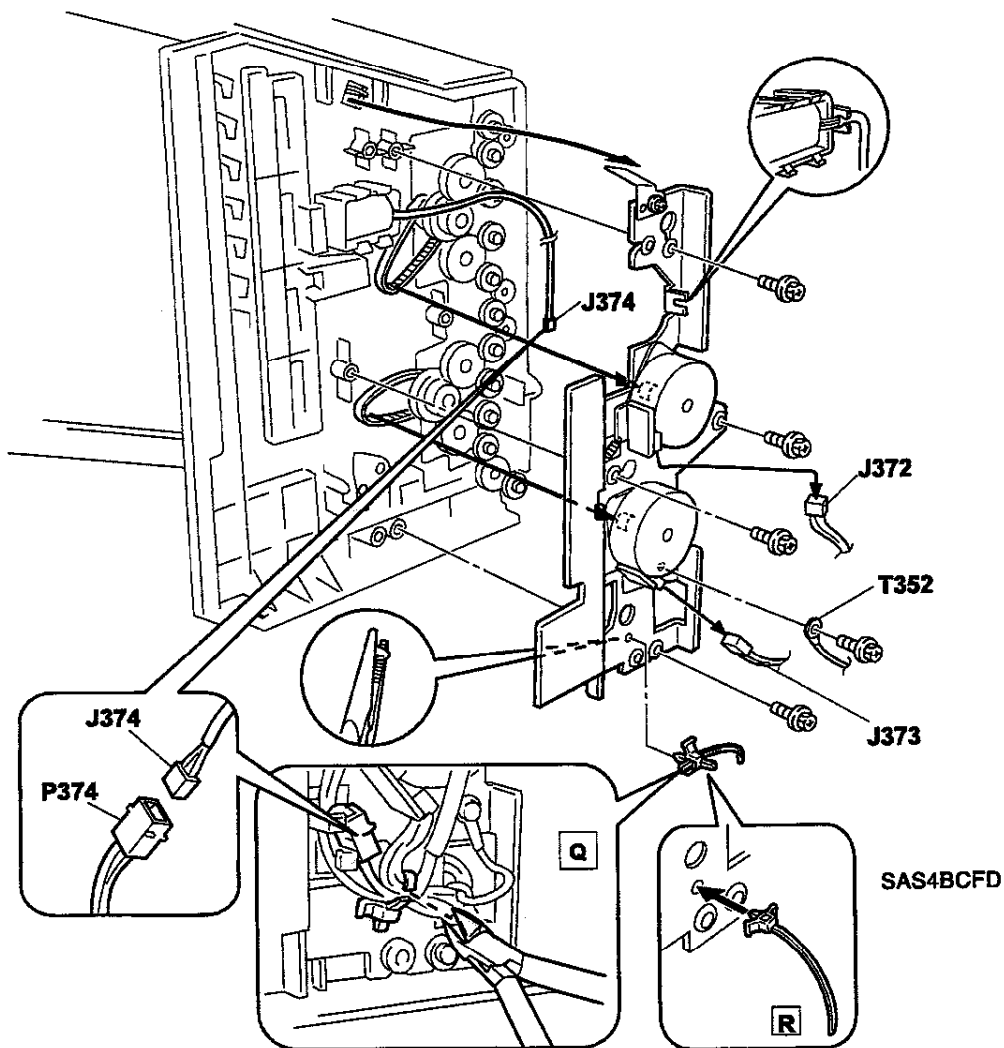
Removing the Motor Bracket Assembly
